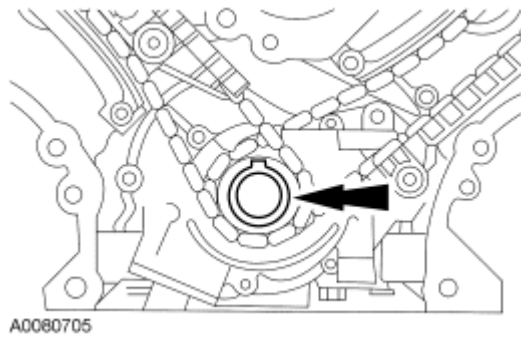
Positioning Crankshaft Keyway At 12 O'Clock Position
